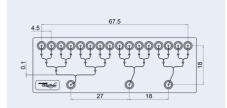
Schematic drawing of splitter chip Fluidic 532
